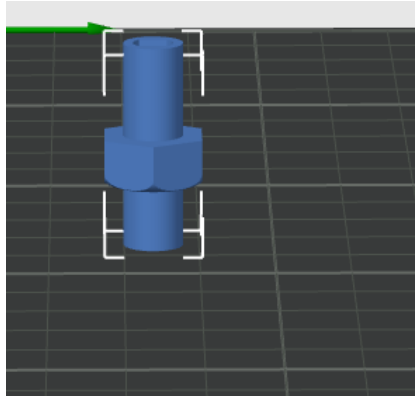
CAD rendering of the proprietary "Inner Join" coupling, engineered to directly mate the dual-flat BO motor shaft with the internal geometry of the 3D-printed drive roller.
